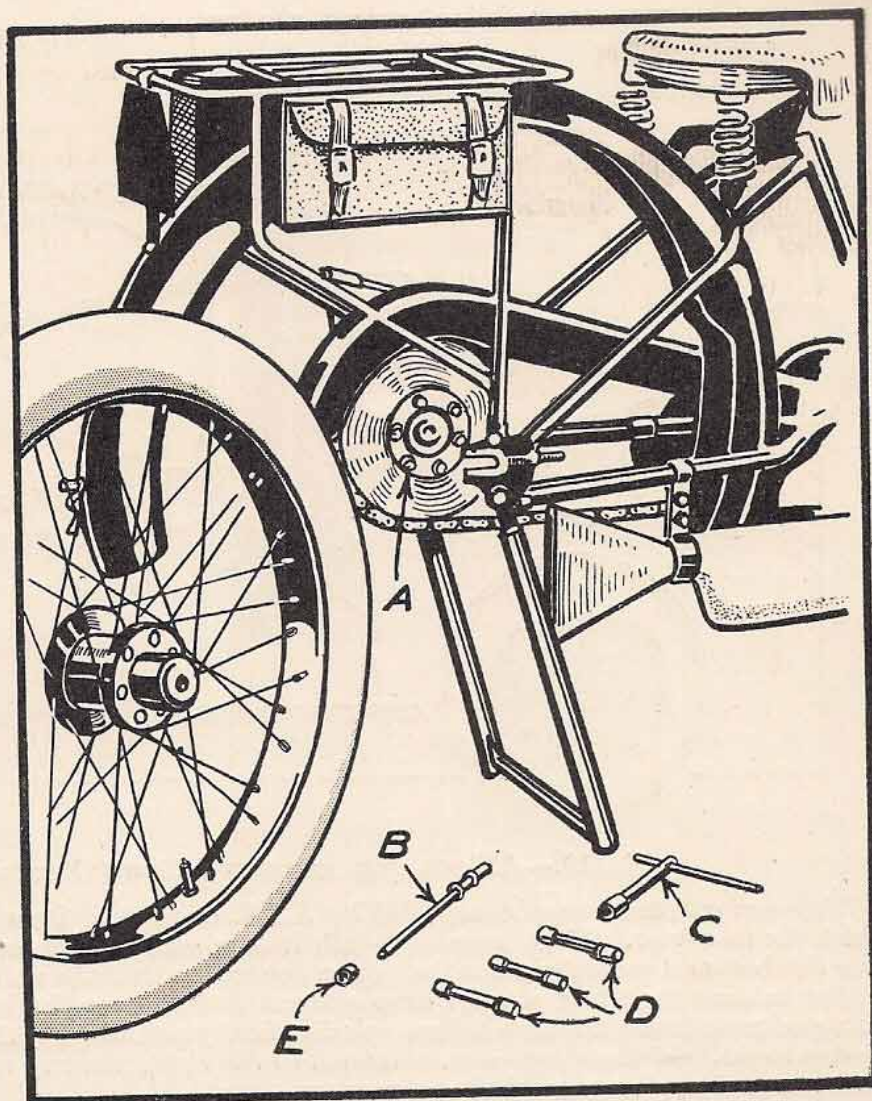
HOW TO REMOVE THE REAR WHEEL.
